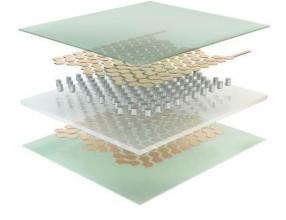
Explosion view of a standard gSKIN<sup>®</sup> sensor.
